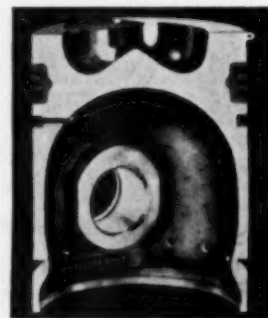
Sectional view of a light alloy piston with bonded ferrous wear insert for the top rings.
